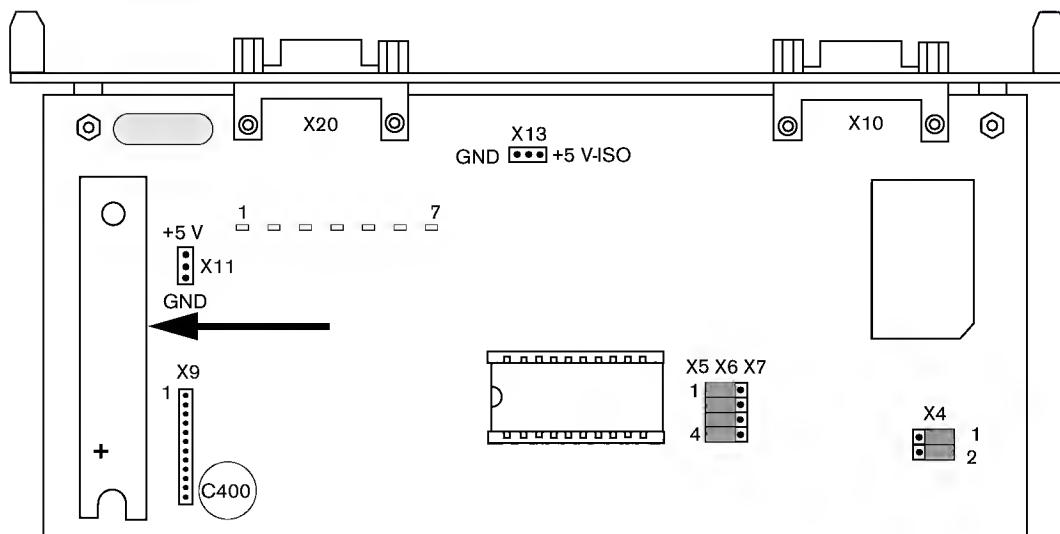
Component mounting diagram CPU PCB (replacing the battery)
